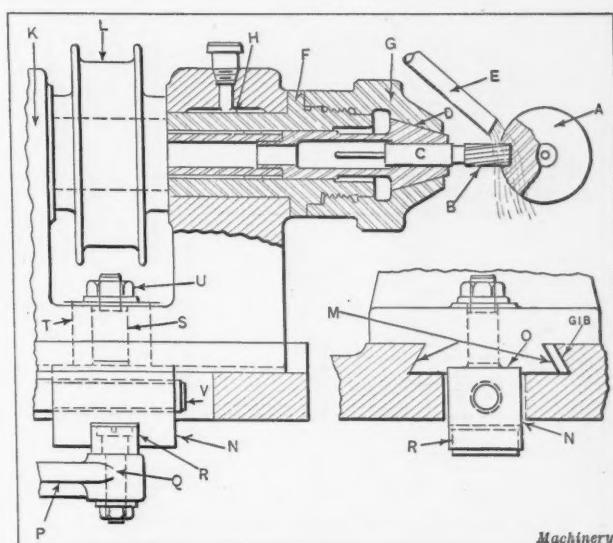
Cutter-slide of Machine shown in Figs. 2 and 3
